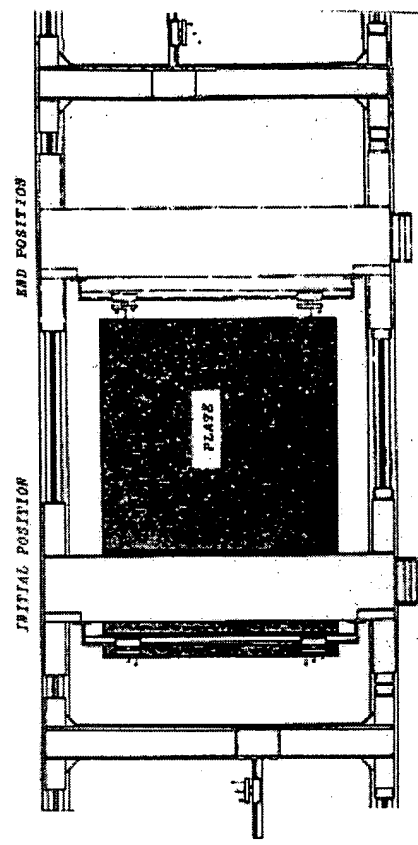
Portal type "S" Flame Cutting Machine.
